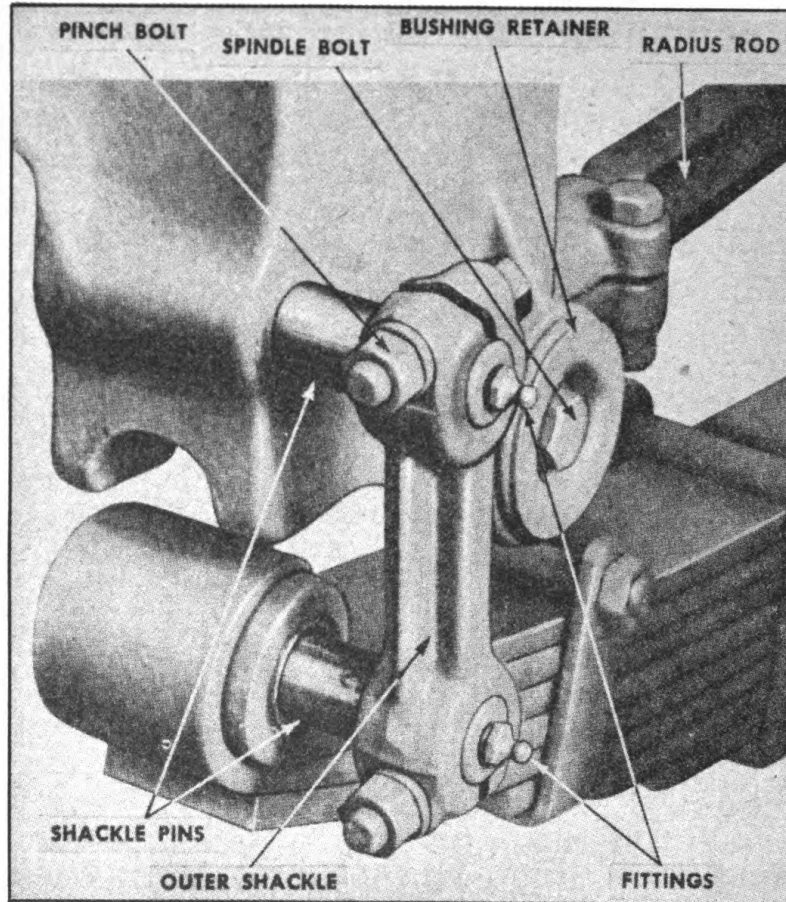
REMOVING SHACKLE AND PIN ASSEMBLY
